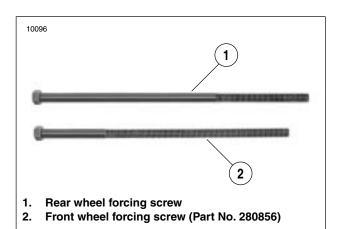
Forcing Screws Used for Front and Rear Wheel Bearing Installation
